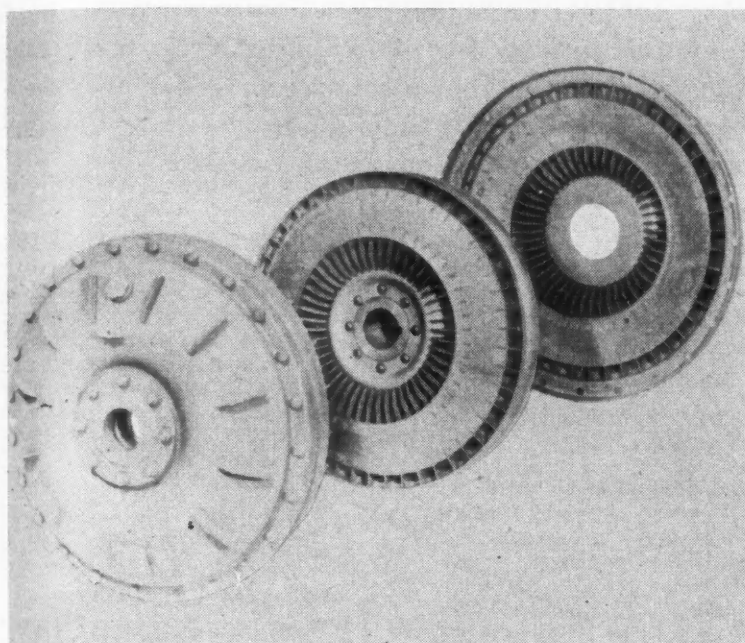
Parts of sheet steel coupling of spot welded construction.
